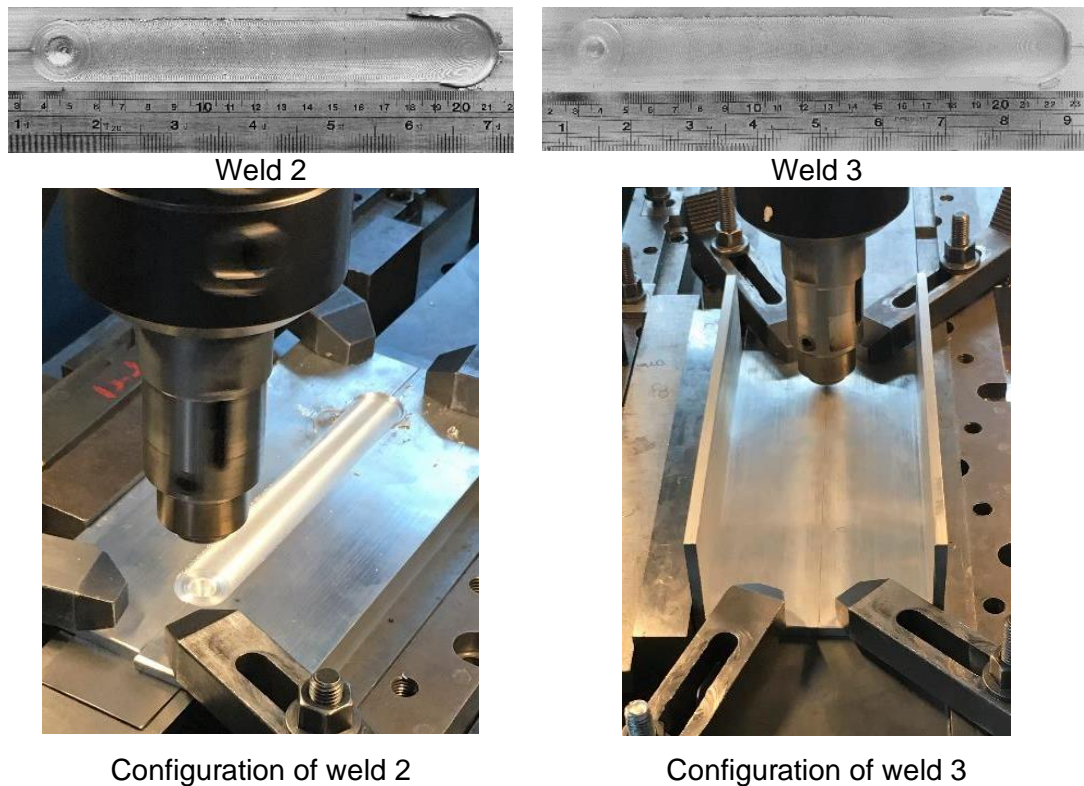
Initial tool for trials for longitudinal welds
